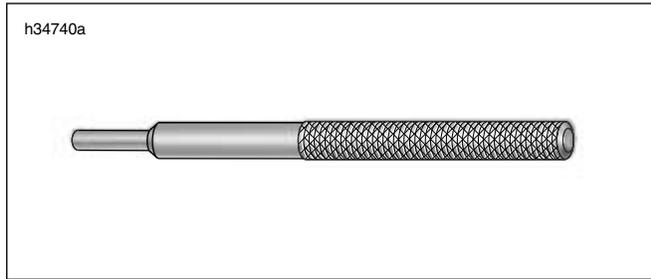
Valve Guide Driver (Part No. HD-34740)
